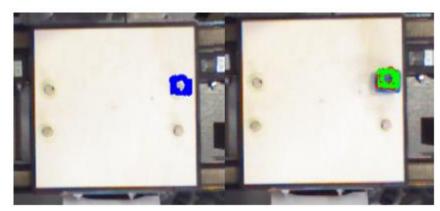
Worker support system - awaiting assembly part (left) and correct assembly (right)
